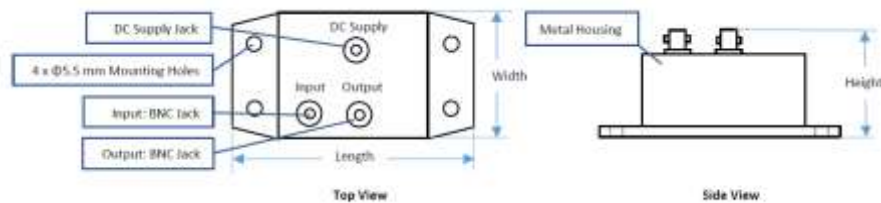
~ Physical drawing of the metal enclosure [123].
